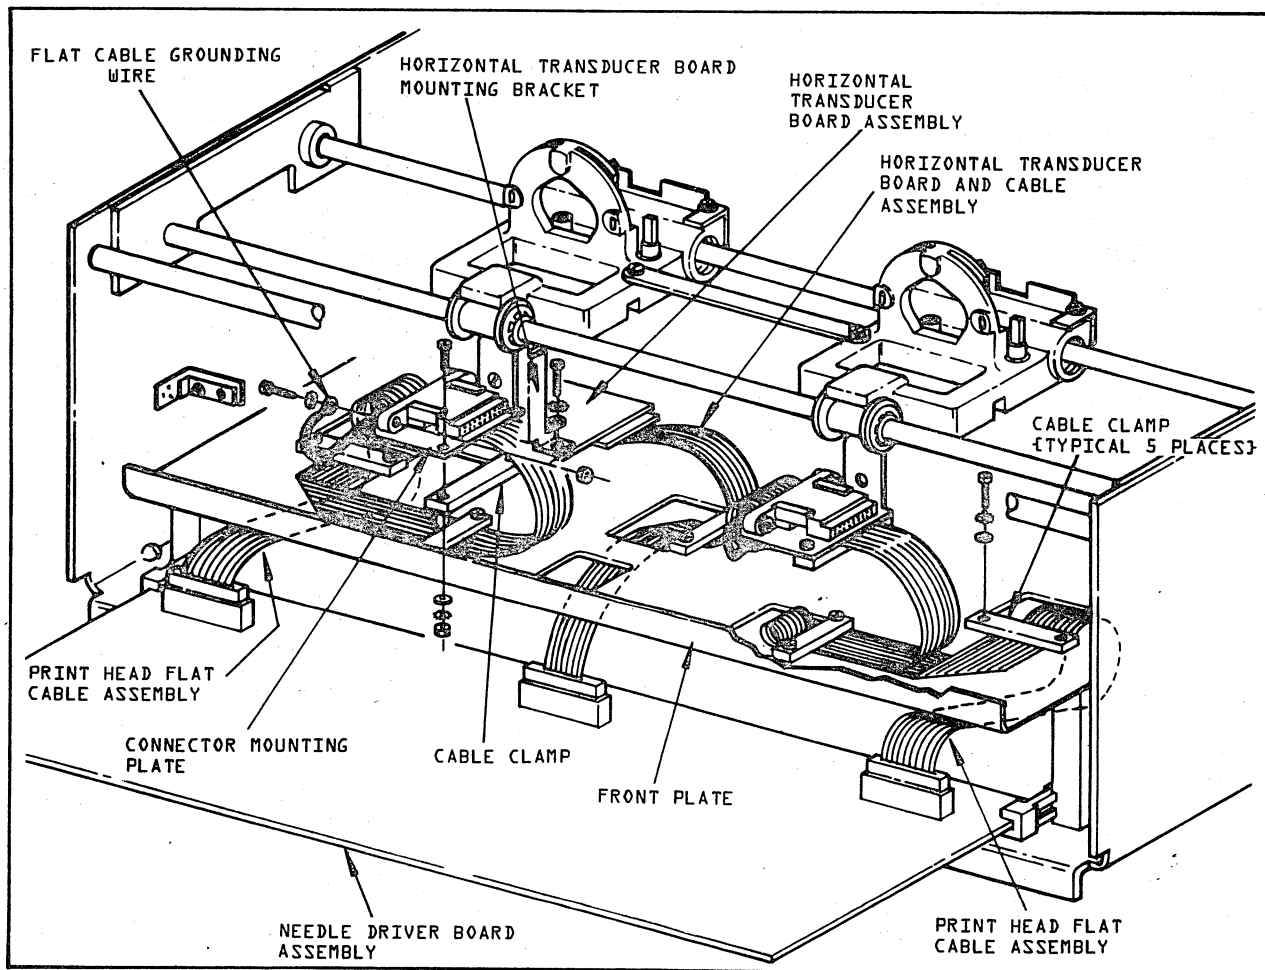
PRINT HEAD FLAT CABLE ASSEMBLY REPLACEMENT, AND HORIZONTAL TRANSDUCER BOARD AND CABLE ASSEMBLY REPLACEMENT.
